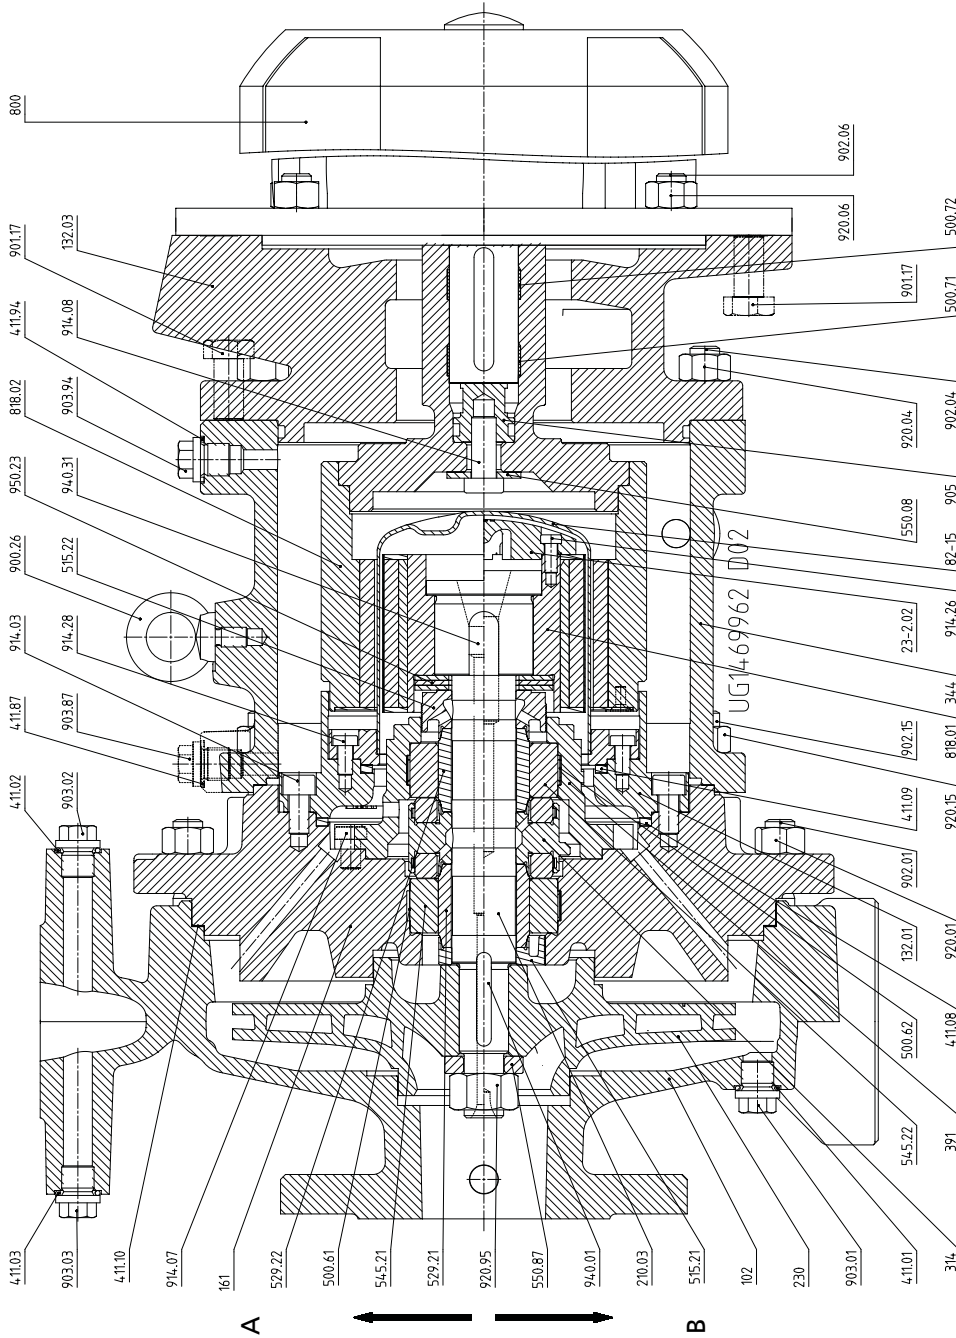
General assembly drawing of model with bolted cover, with intermediate piece
